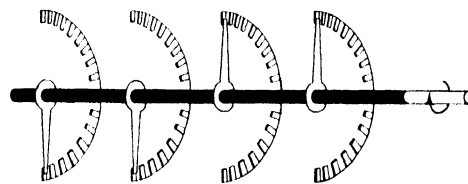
WIPERS ARRANGED FOR DOUBLE SEARCH
